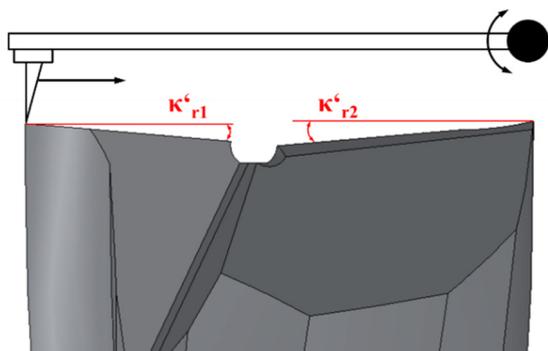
Schematic illustration of the measurement of the face cutting edge contour to determine the tool related tool minor cutting edge angle κ'_r .
